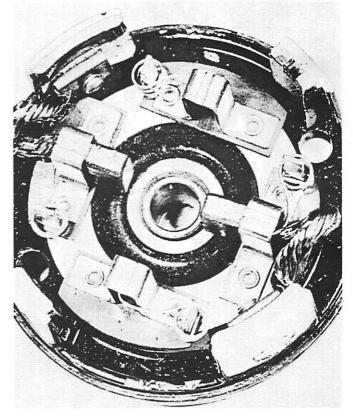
Commutator End Plate Assembly with Springs and Brushes in Place
